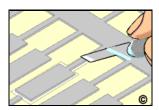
Cut out the new surface mount pad. Cut from the plated side.
